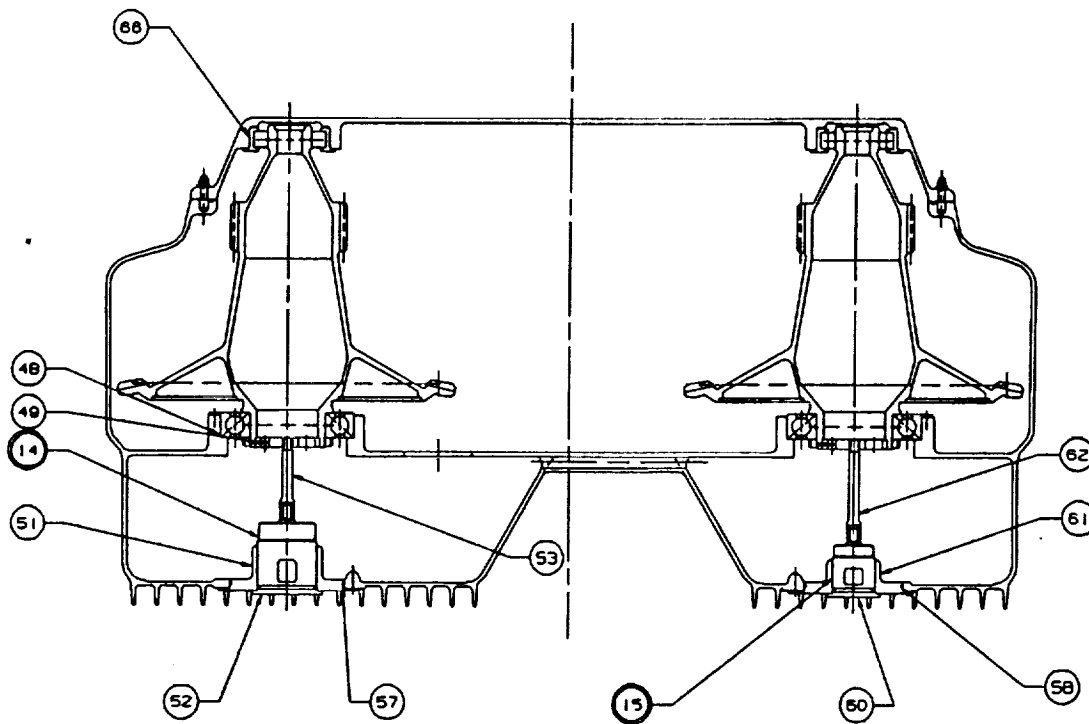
ART Face-Up Face Gears/Lubrication Pump Drives
